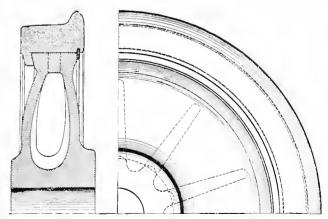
Paige Spoke Coach Wheel. Cast Iron Spoke Center with Tire Secured by Shrinkage Retaining Rings and Bolts.
